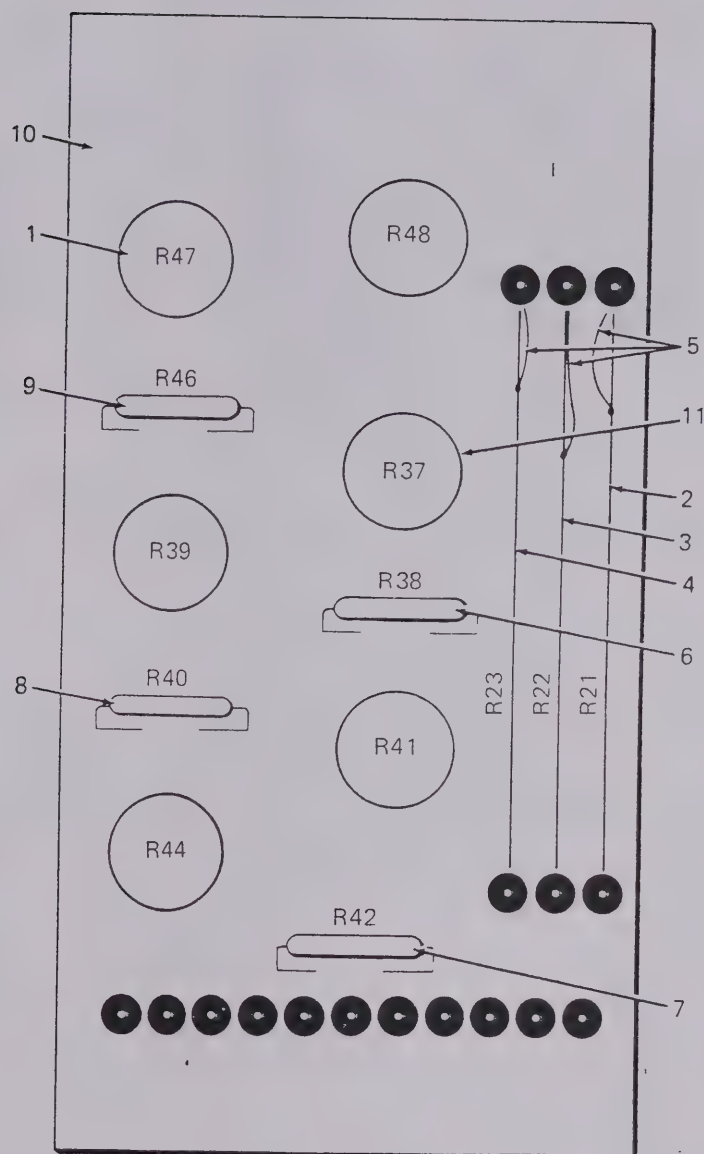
Calibration Board Assembly, Part No. 2421-746
